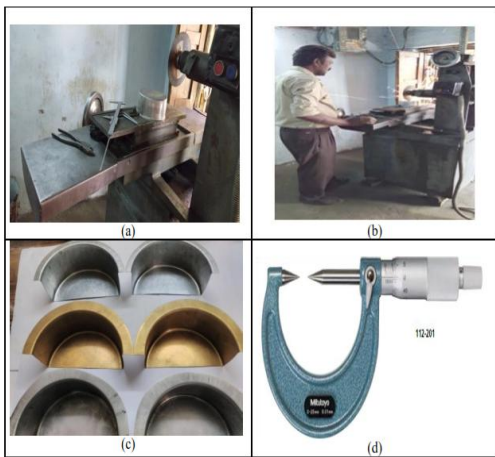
Setup for cutting circular cups using surface grinding machine and measurement of wall thickness (a) Cups sectioned in the middle using surface grinding machine (b) Cup sectioning operation in progress (c) Cup sectioned in the middle (d) point to point micrometer use for measurements of wall thickness
